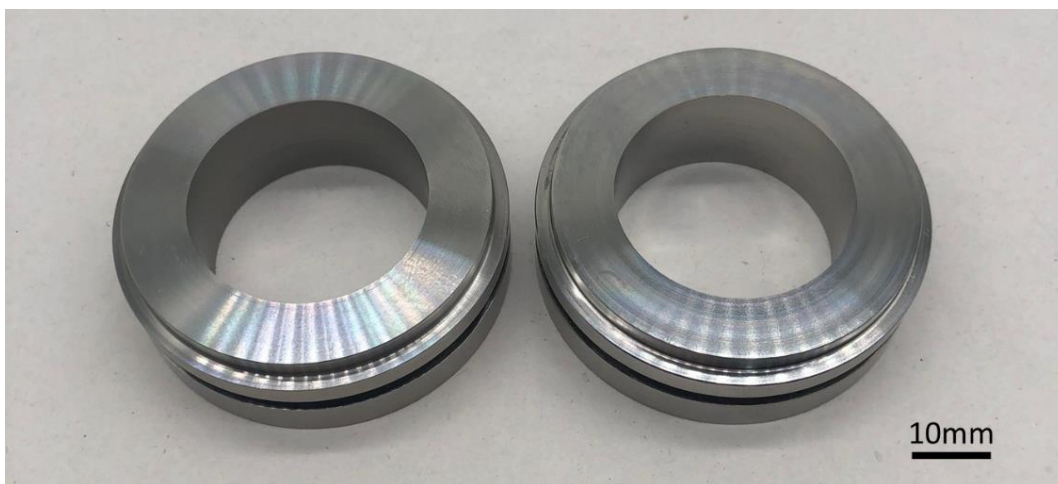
Net-shape mechanical seals after pickling and machining.
